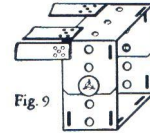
shows the use of the C-180-D connector as the pivoted end of a boom. The lower and upper connectors may be pivoted by the snap rivets shown or by a rod or bolted as described in FIG. 26.
